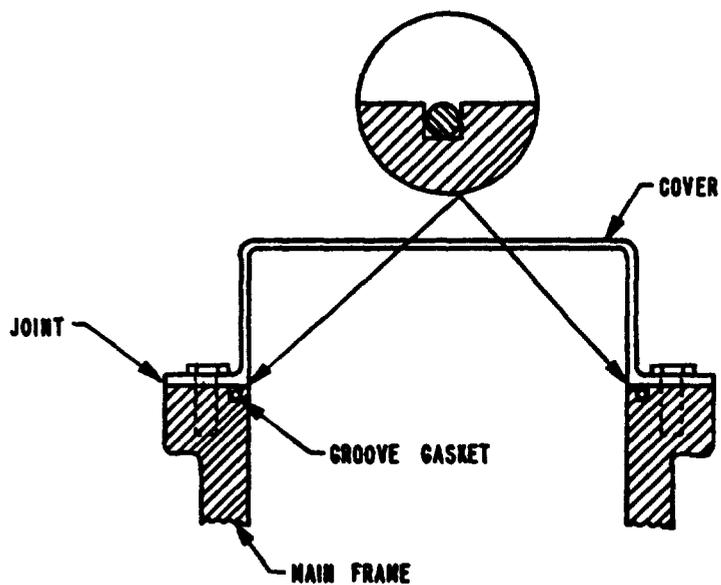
FLAT-FLANGE TYPE JOINT WITH GROOVE GASKET
